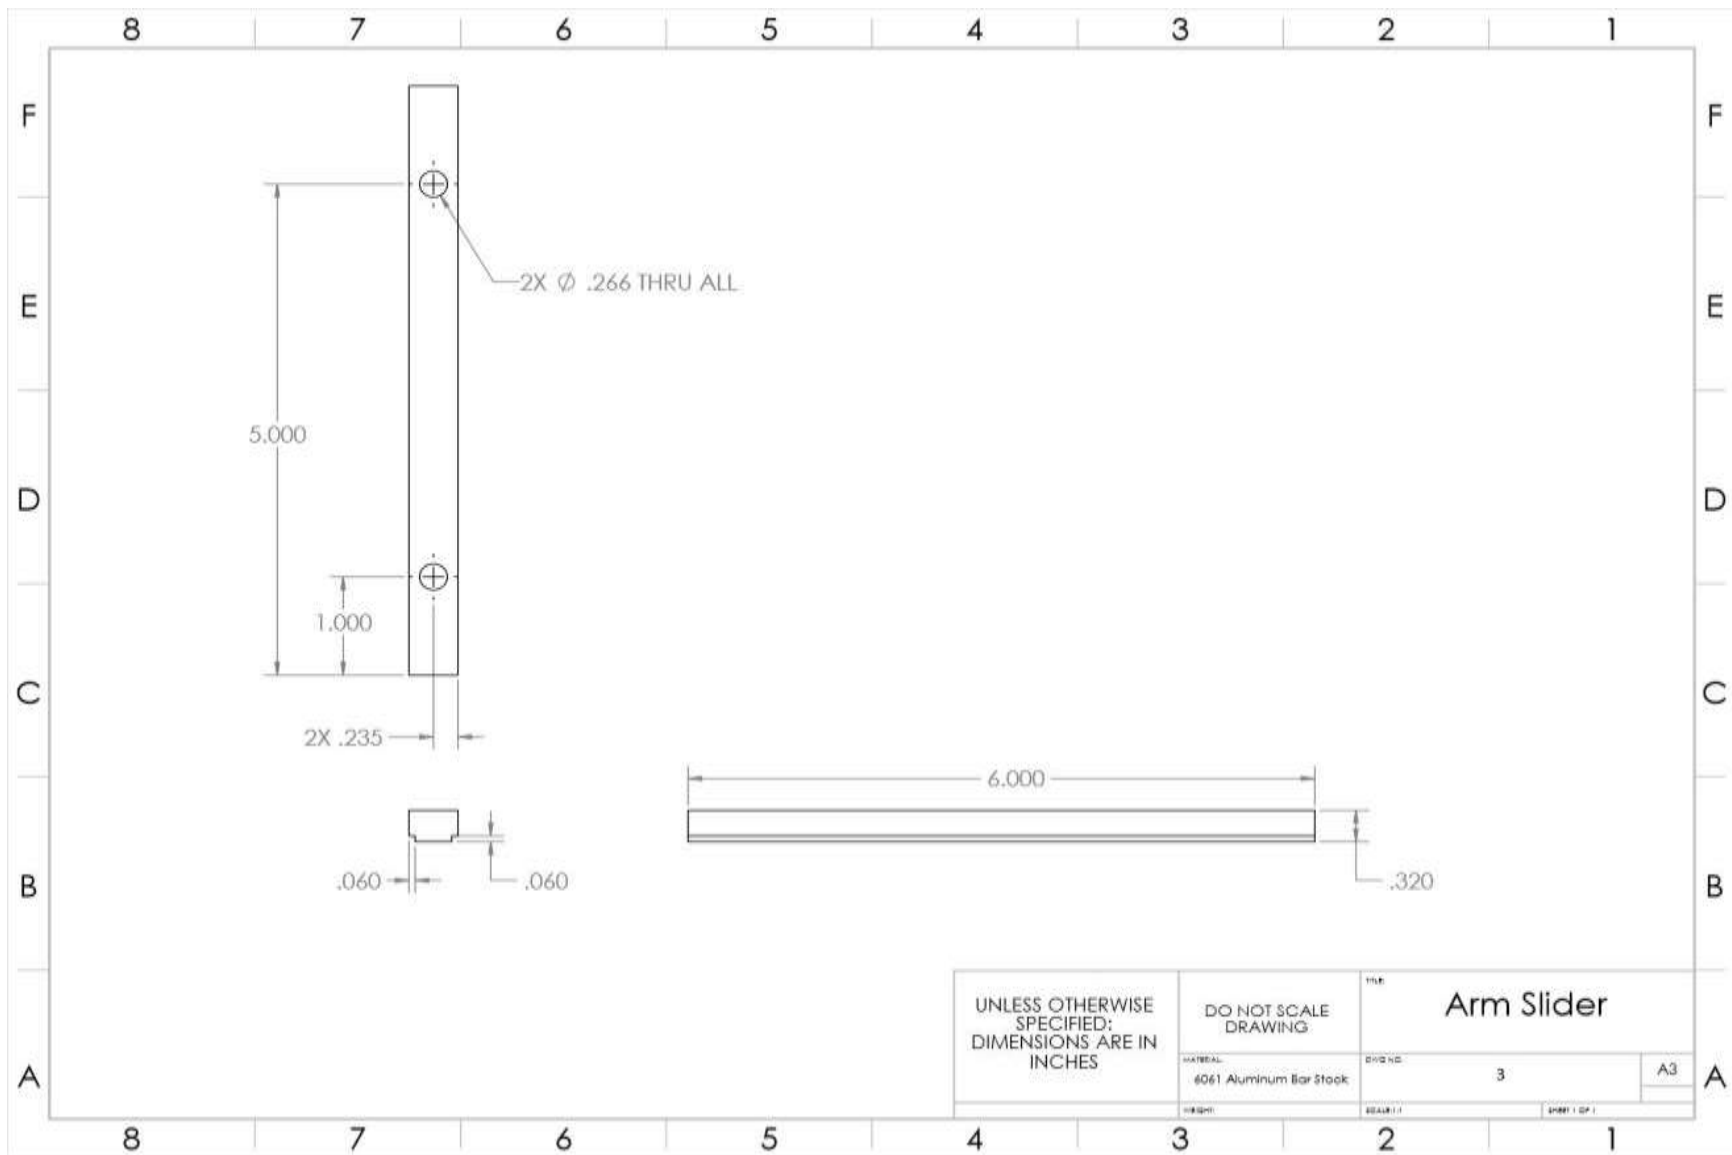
3. Mechanical Drawing of Arm Slider.
